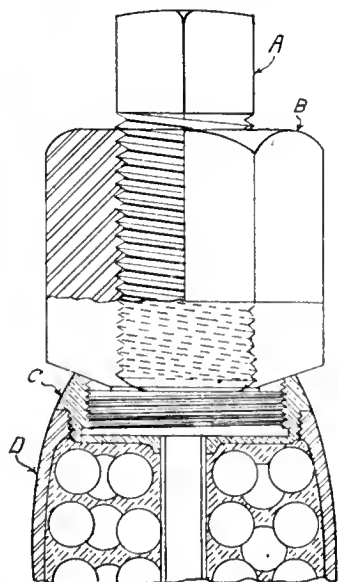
TOOL FOR REMOVING BRASS SOCKETS.
